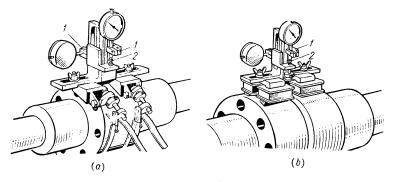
Alignment fixtures with flat (a) and electromagnetic (b) holdfasts
